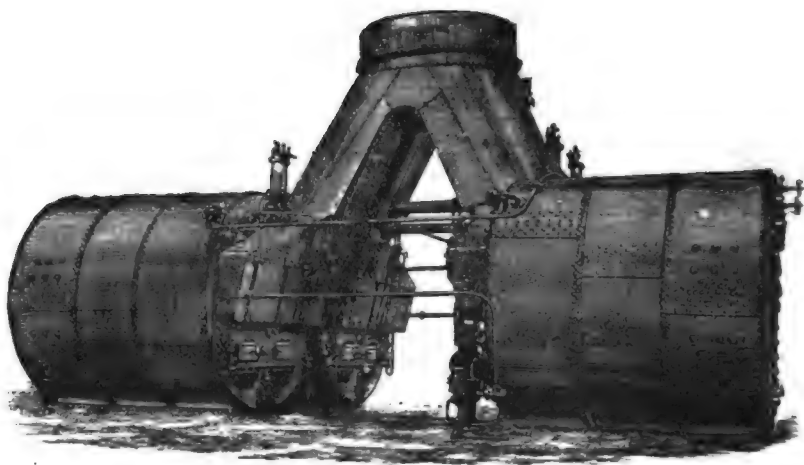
SETTING AND CONNECTION OF SCOTCH BOILERS.
